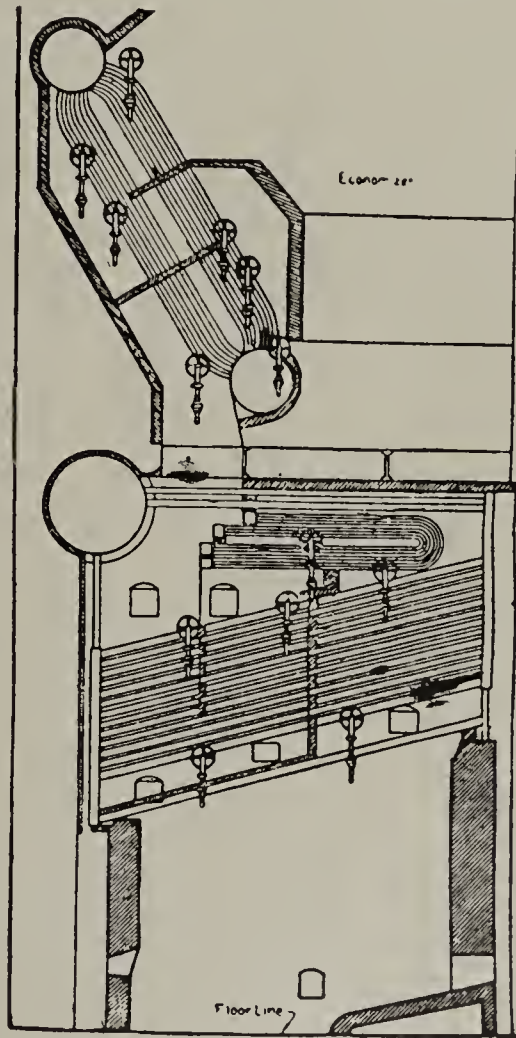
Integral Type Economizer Equipped With Mechanical Soot Blowers.
